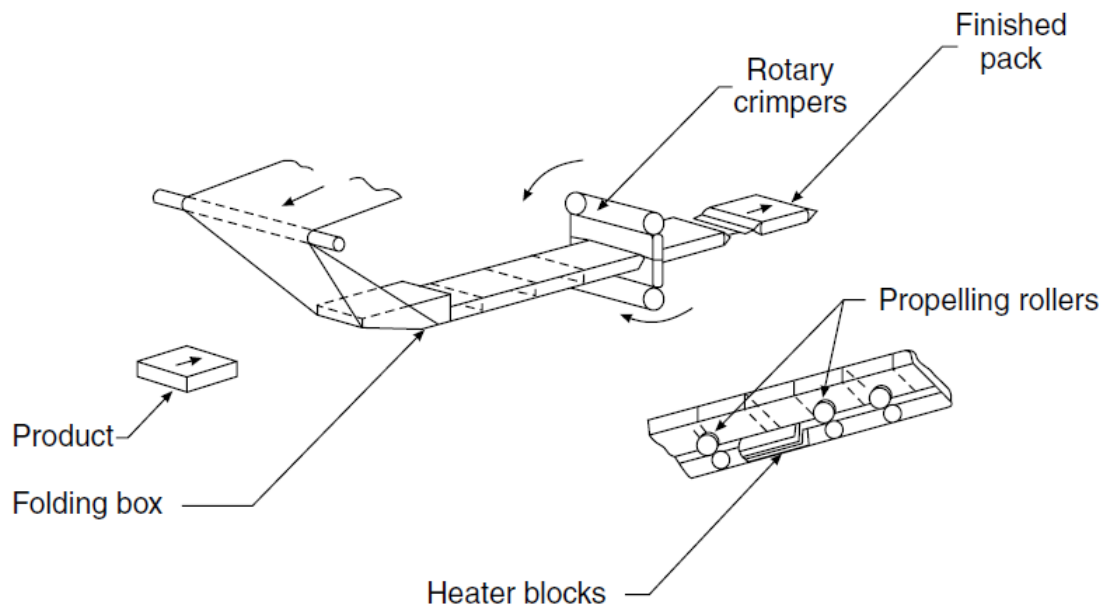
Horizontal form fill seal machine (HFFS)(Coles et al., 2003)
